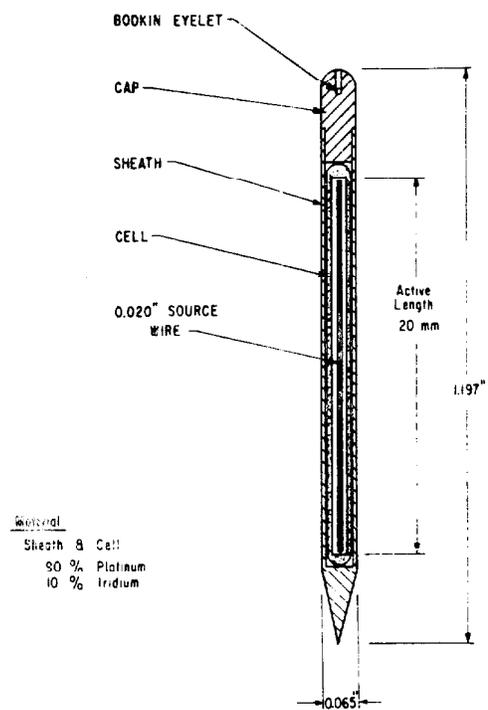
^{252}Cf NEEDLE ASSEMBLY
